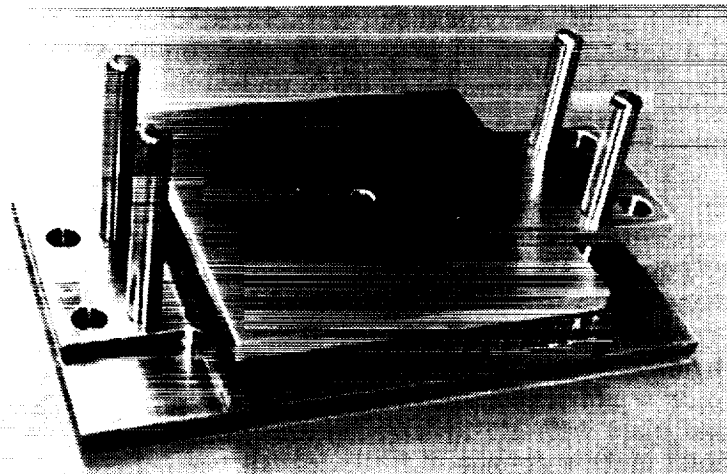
Photograph of a specimen in the bonding fixture between two load plates.
